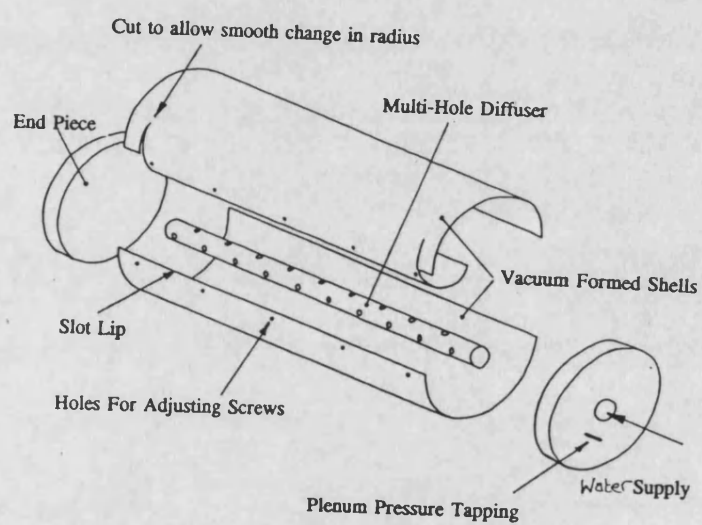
Exploded View of Vacuum Formed Slot Rig
